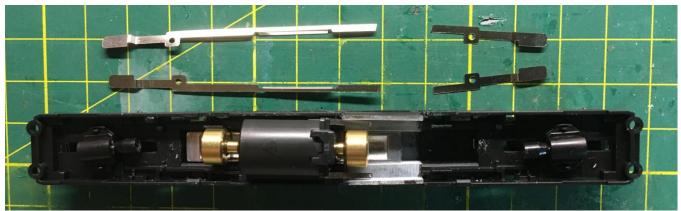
Strips cut approximately 10 mm behind the front of the extension piece
